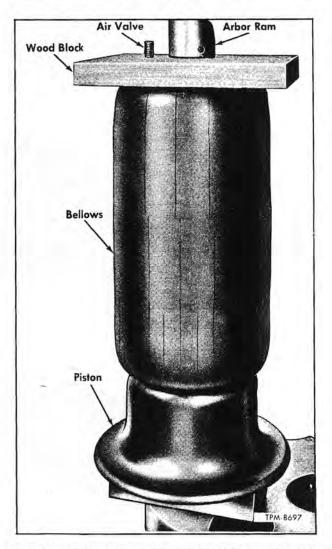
Forming Bellows Loop over Piston Using Arbor Press
